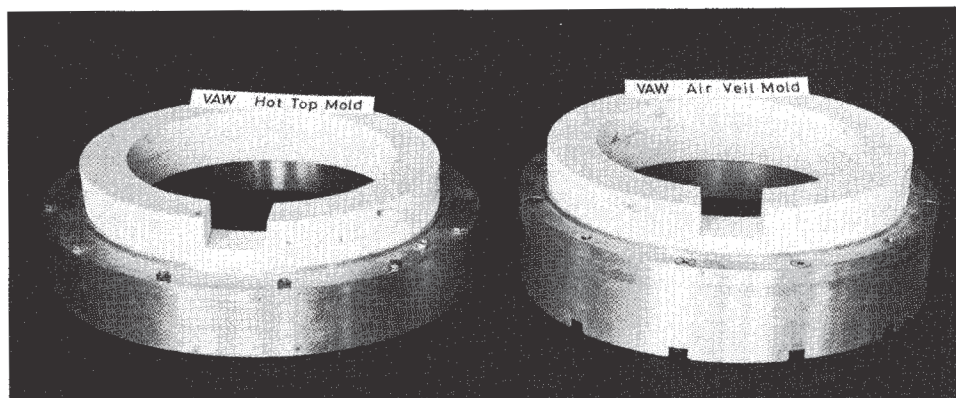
External appearance of the VAW Hot Top Mold (left) and the VAW Air Veil Mold (right)
